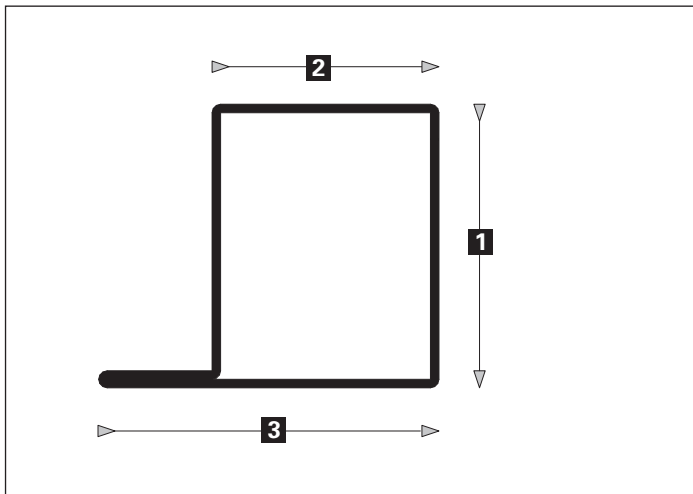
Welding sequence for Jansen-Economy frame profile
